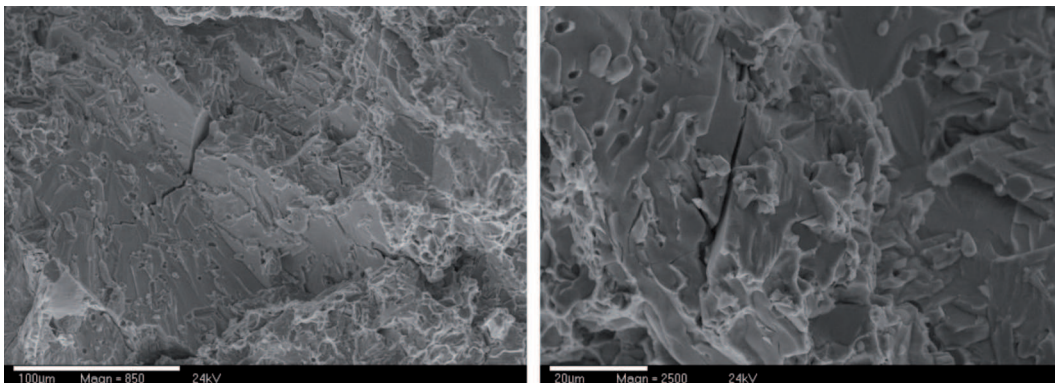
Scanning electron micrographs of destroyed babbitt surface fracture; bearing
